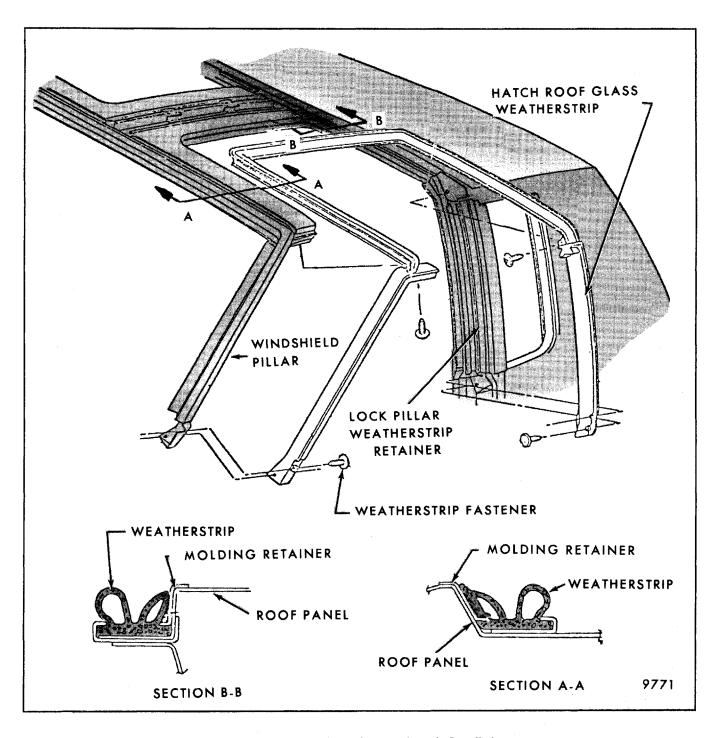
Hatch Roof Opening Weatherstrip Installation
